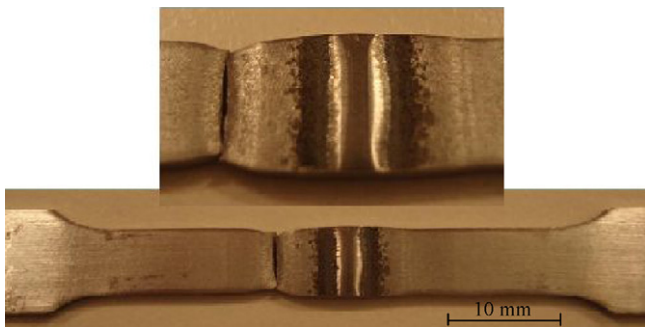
Typical failure location of the tensile test samples of the laser welded DP600 steel joints.
